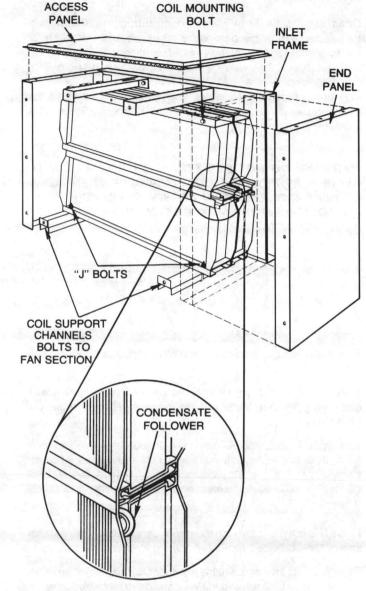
Draw-Thru Coil Section Details with View of Condensate Follower
